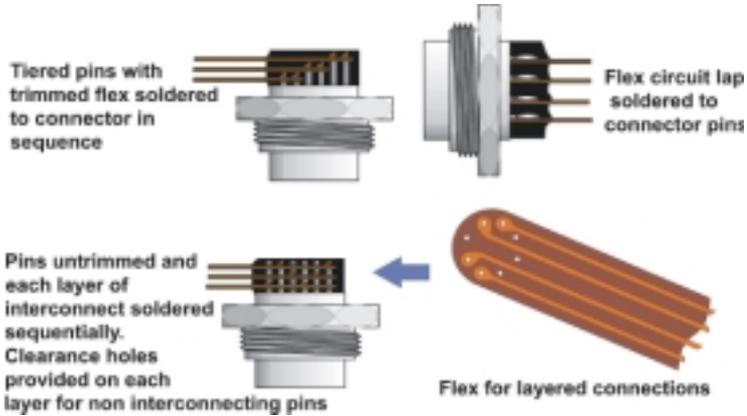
Historical approaches for soldering military style two part connectors to flex circuits. A key concern is inspection, as solder joints are hidden by each successive layer.
